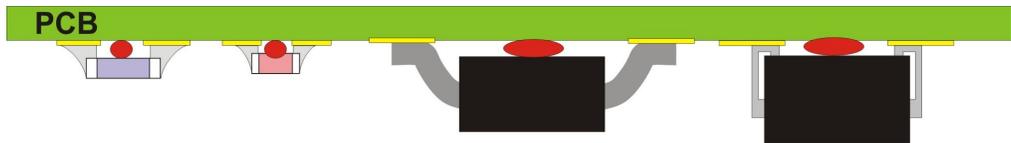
One-sided PCB with SMD components prepared for wave soldering
